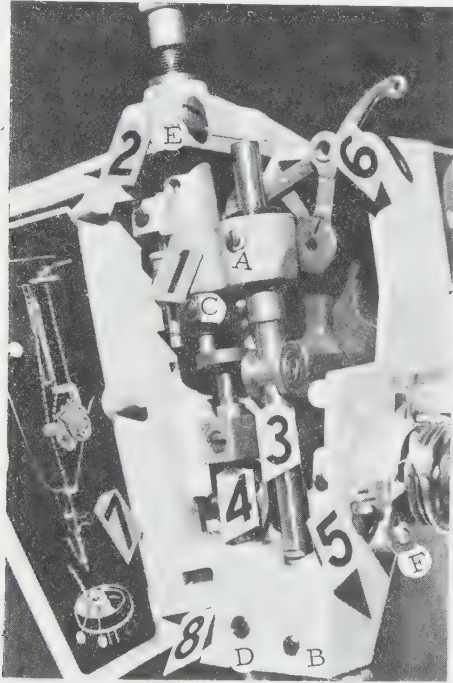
illustrates the face plate assembly with plate cover open. It also shows the threading chart for upper and lower tension.
